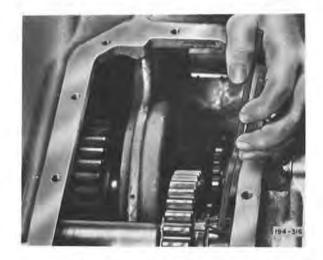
Installing P. T. O. Gear Front Snap Ring
